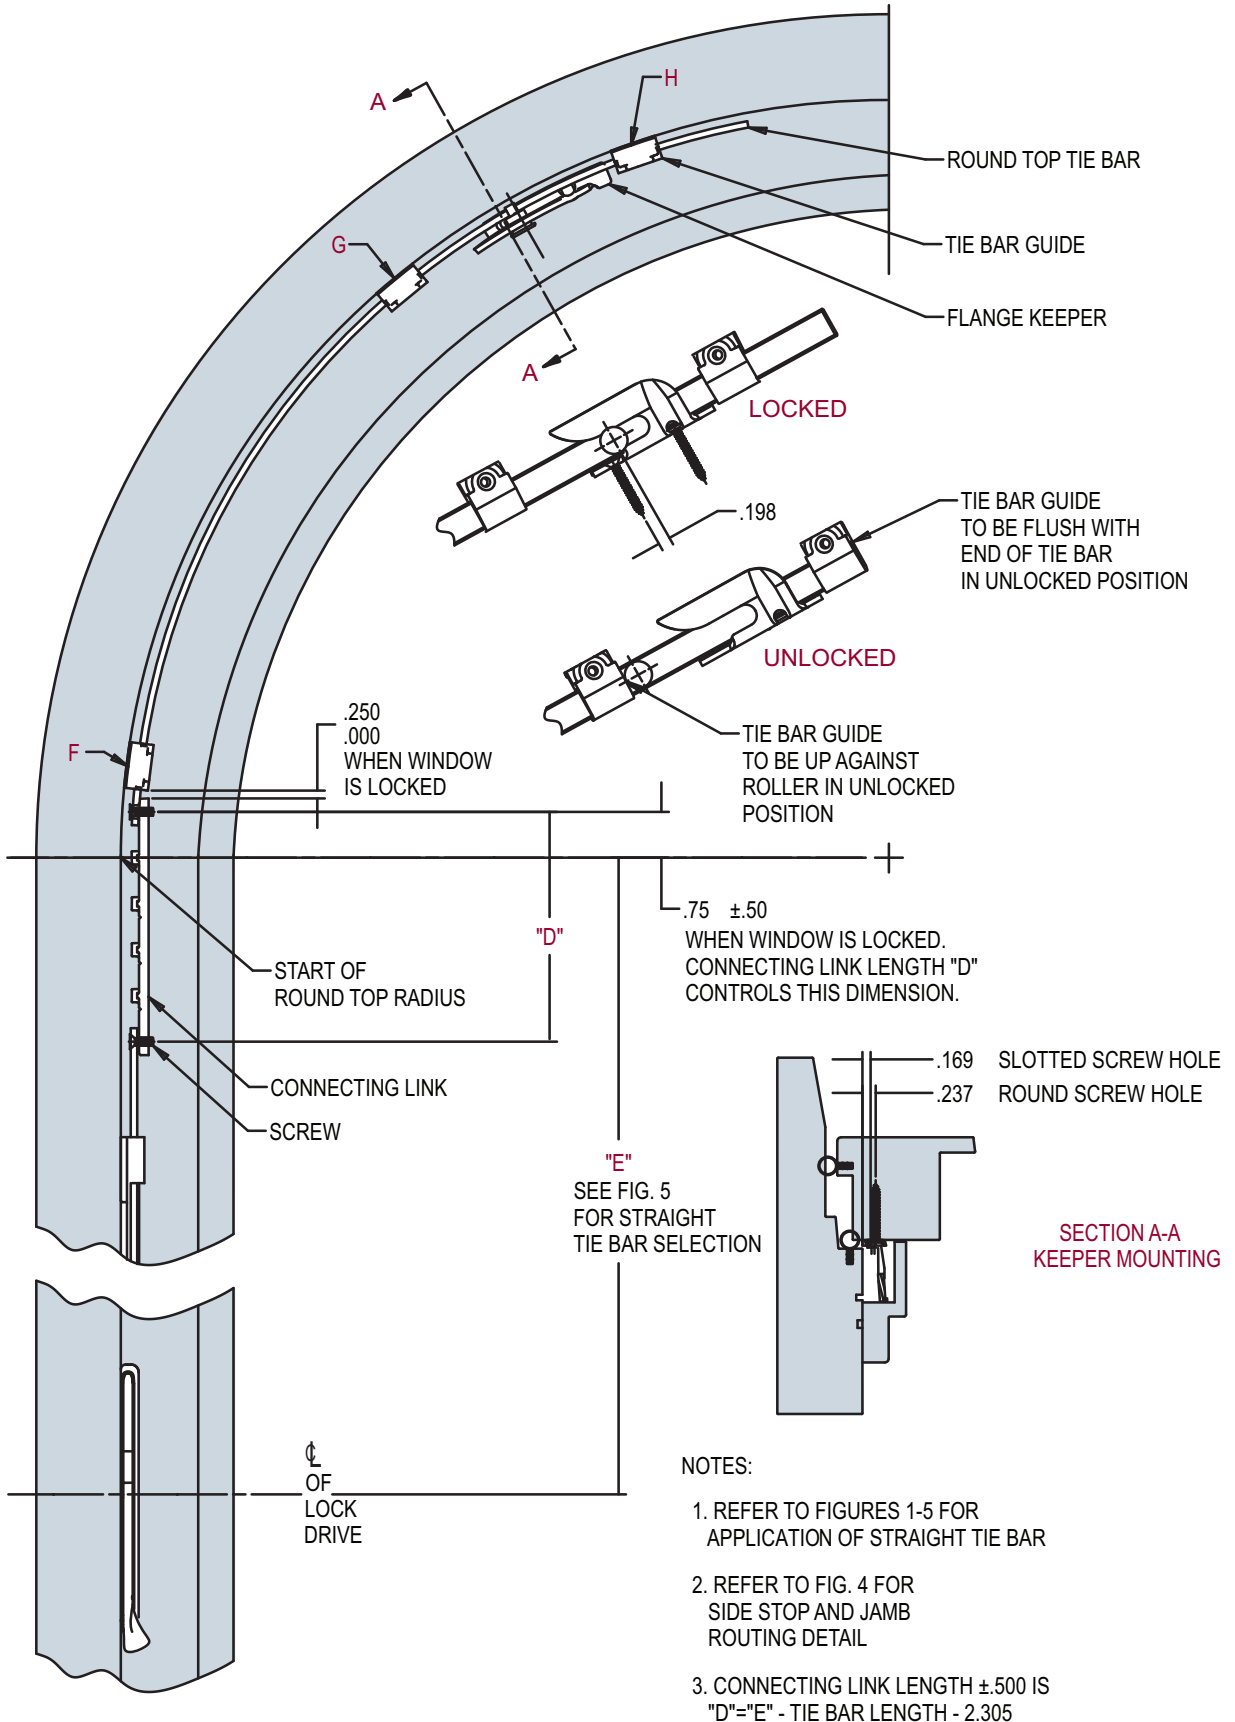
LOCK DRIVE ASSEMBLY 12642.92
